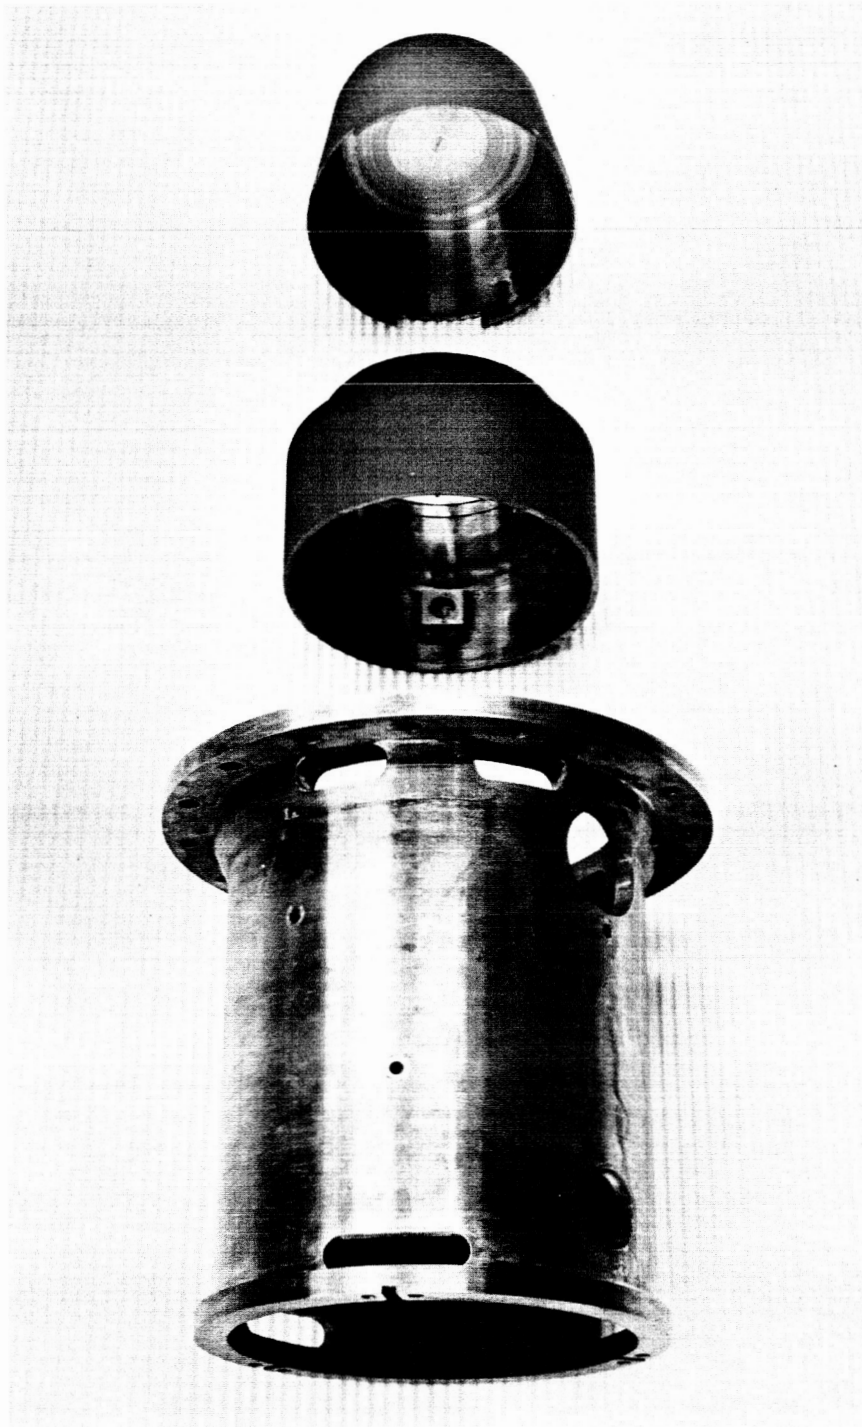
Interrupter Unit for AC Breaker, Including Upper and Lower Capsule Radiators, after Iron Titinate Plasma Spray Coating.
